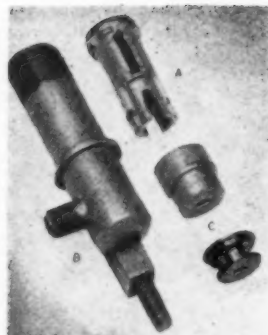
Die-castings, machining of which is described, include lock cylinder A, antenna support B, and plunger cap C, as it appears before and after machining.
